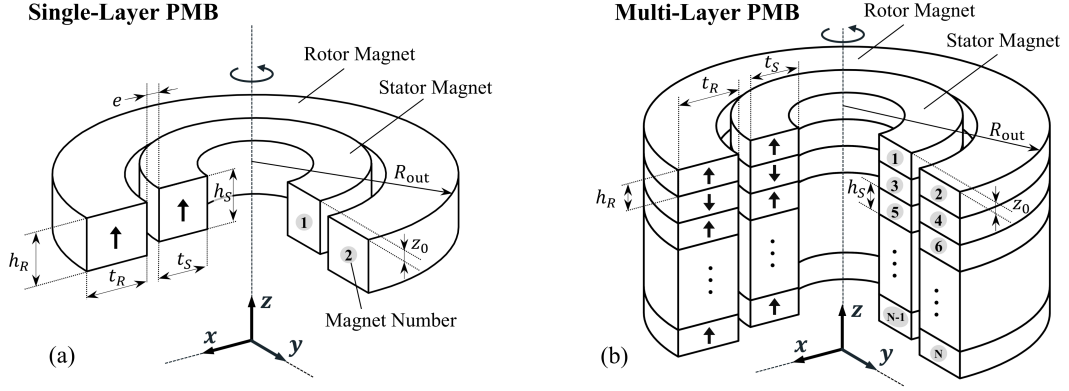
Cut-through illustration of (a) a single-layer and (b) a multi-layer radial permanent magnetic bearing (PMB) composed of axially magnetized ring magnets, with indicated dimensions.
